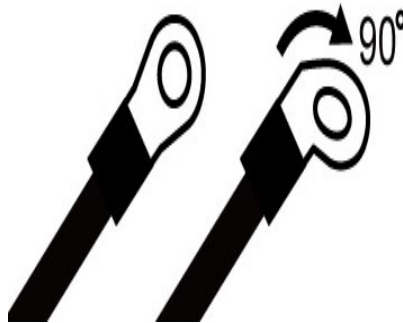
Assembling 62050P Input Terminal Safety Cover - 2
